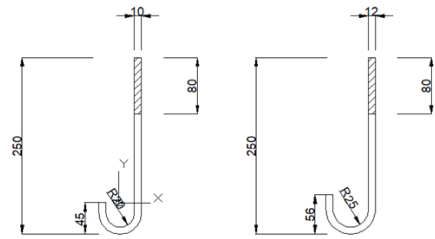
M10/12 J-type hook anchor bolt design diagrams
